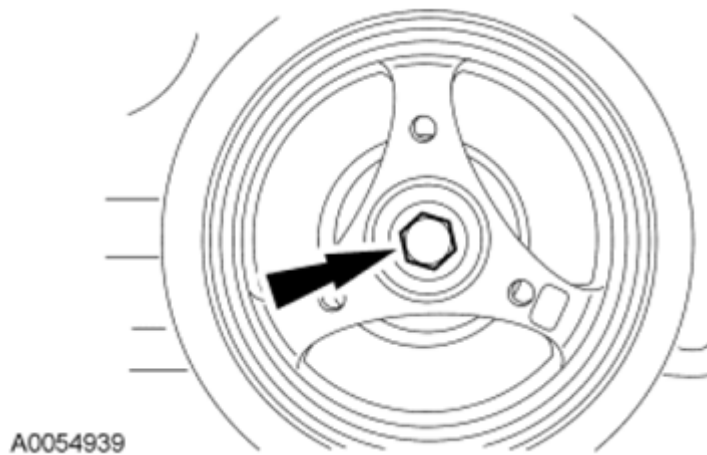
Locating Bolt And Belt Idler Pulley
